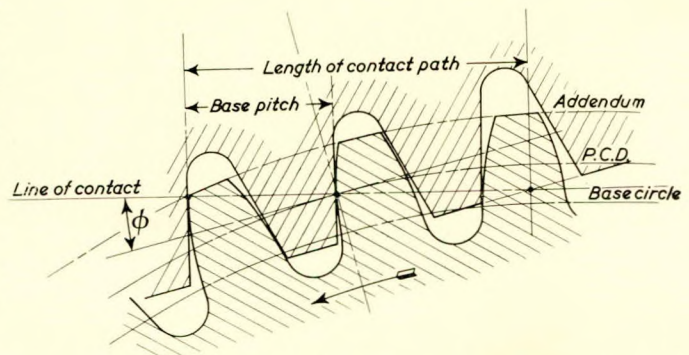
$14\frac{1}{2}$ -deg. ordinary involute; 30-tooth pinion meshing with a rack; $7/12$ -in. \times $14\frac{1}{2}$ -deg. tooth form
